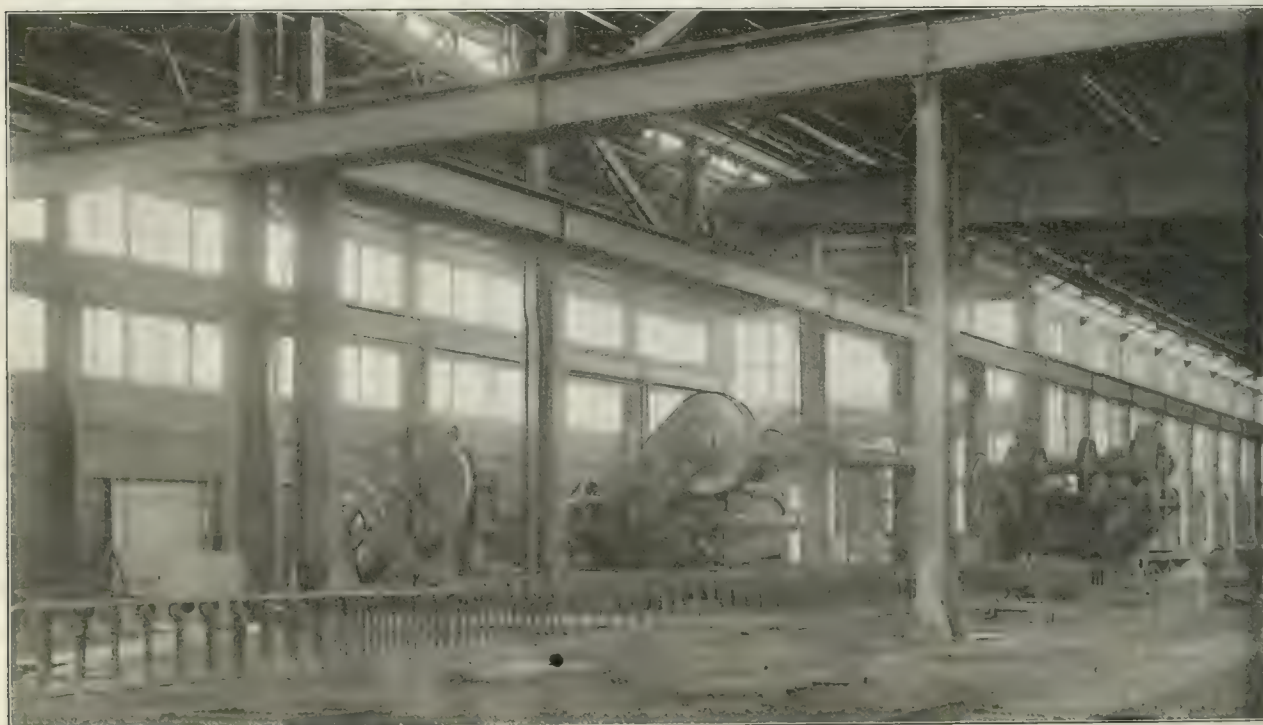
View of Shears Nos. 2 and 3 of 60-in. Universal Plate Mill at Gary, Ind.
